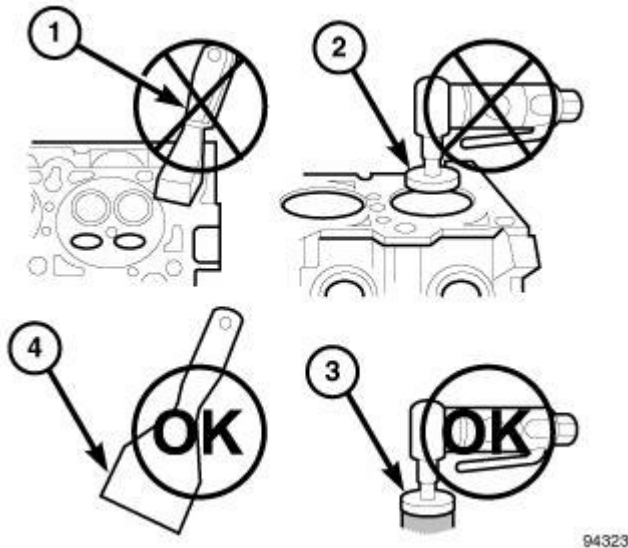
PROPER TOOL USAGE FOR SURFACE PREPARATION
